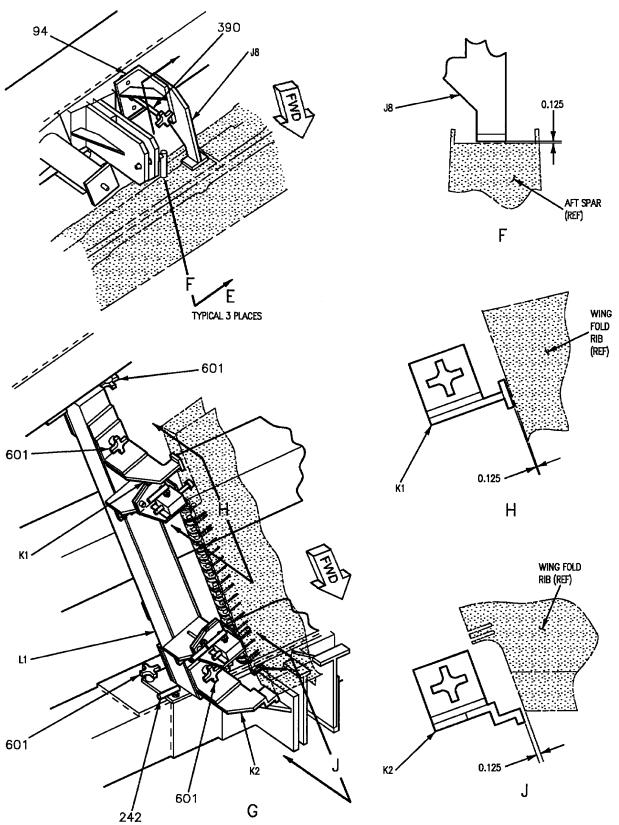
Inspection of Inner Wing Contour (Sheet 3)
